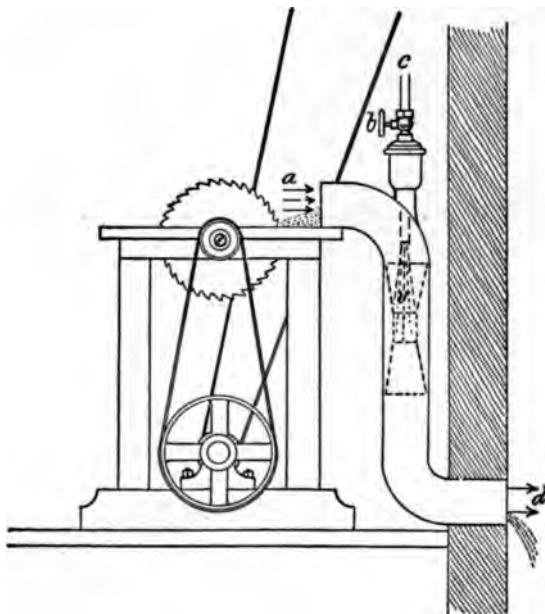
Apparatus for removing dust in manufacturing establishments: *a*, inlet to exhaust shaft; *b*, valve regulating spray; *c*, water-supply pipe; *d*, outlet of exhaust shaft.
